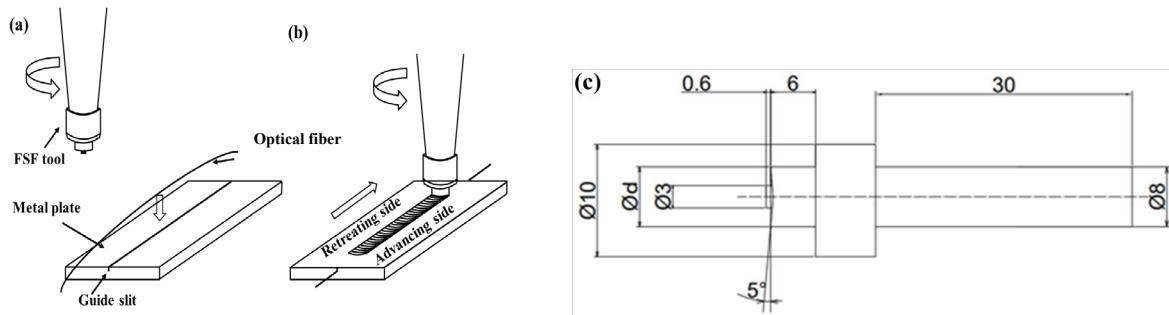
Schematic of the experimental procedure (a) rotating tool is plunged into the workpiece, (b) tool is traversed along the guide slit to mechanically interlock titanium and optical fiber [1], (c) Dimension of FSF tool ($d = 8, 10, 12$ mm)
